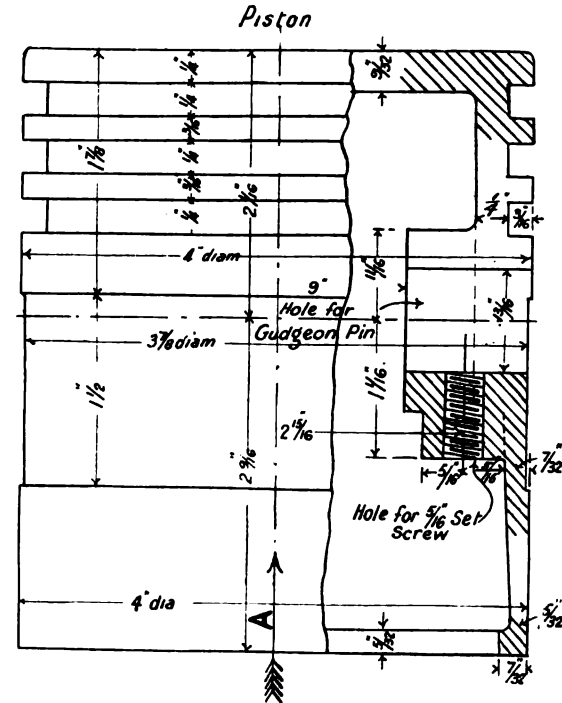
Piston for petrol engine (Drawing Exercise).
